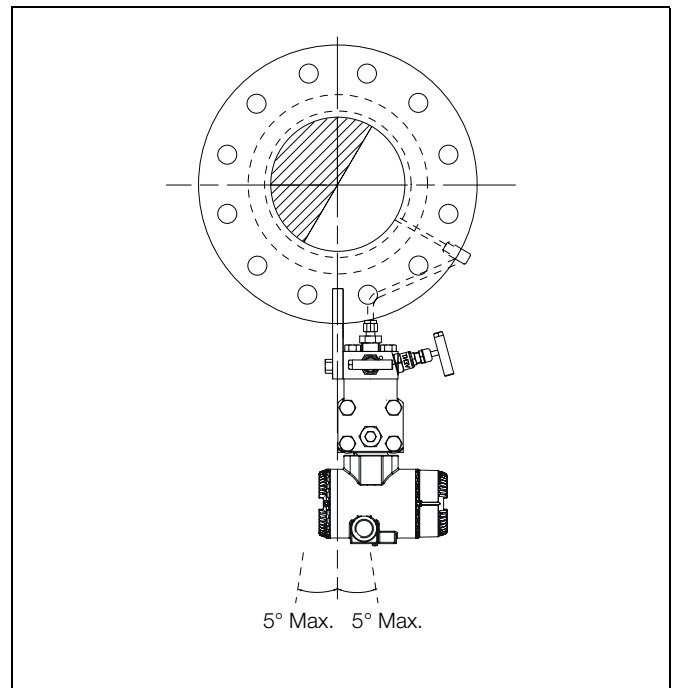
Horizontal Pipe Mounting – Liquid Steam Applications
